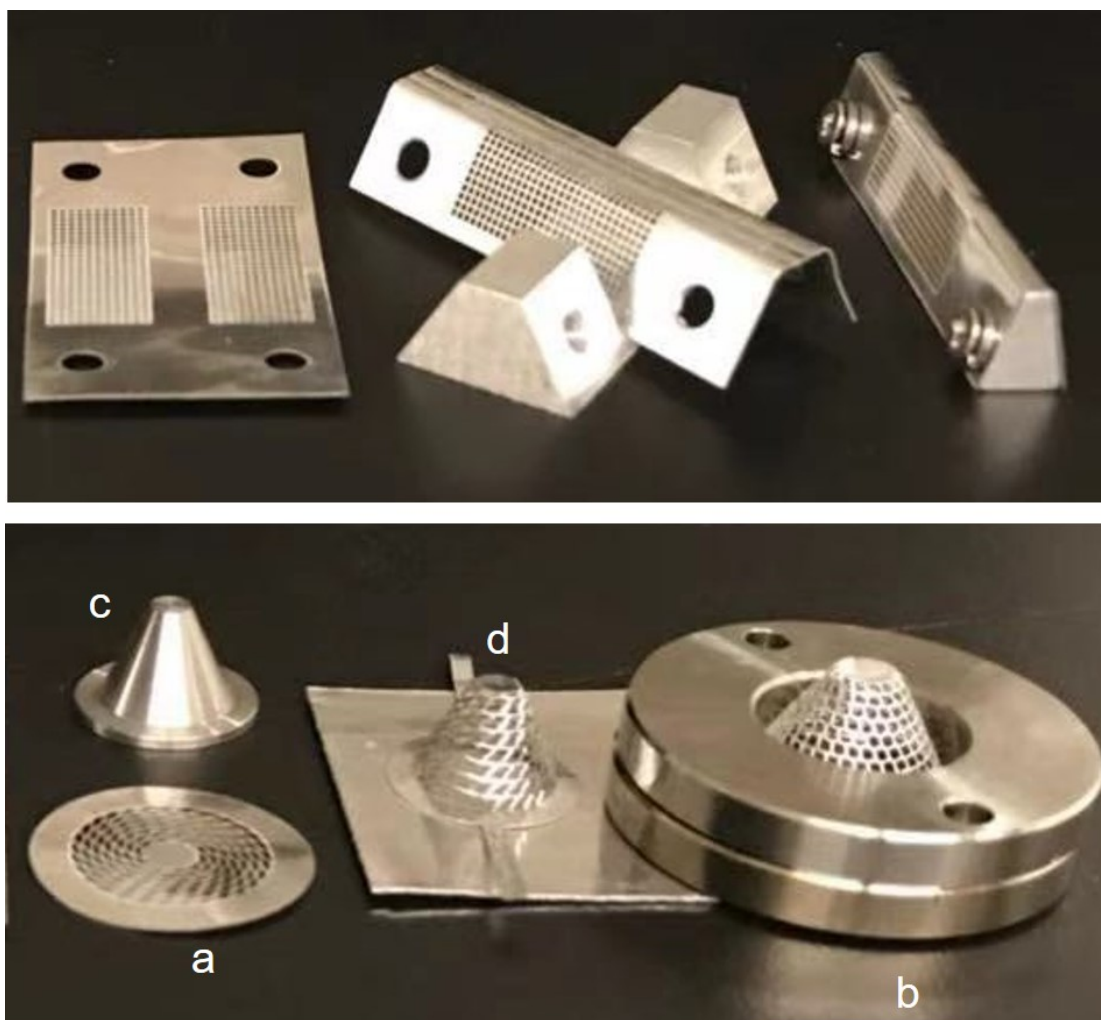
Patterned aluminum foil and accessories for making Faraday cages. For the cone-like cage: first a pattern is written on an aluminum foil (a) via laser ablation, after which a pair of clamps (b) is used to hold the rim, so that one can use a mold (c) to extrude the foil into a 3D cage. Before sent into the plasma etcher, a diamond substrate is placed on another aluminum foil serving as the conducting base and the extruded cage is electrically connected to the base either with aluminum conductive tape or with screws if a tail (d) is available for fixing the cage onto the foil base at a distance from the cage center (otherwise the the screw may modify the electric field distribution and therefore introduce asymmetry for the etching). While the aspect ratio can be changed easily by varying the design parameters, a fundamental limit is set by the geometrical limitations as explained in Appendix B. Here all materials (pure aluminum and stainless steel) are compatible with ICP-RIE etcher without introducing contamination.
